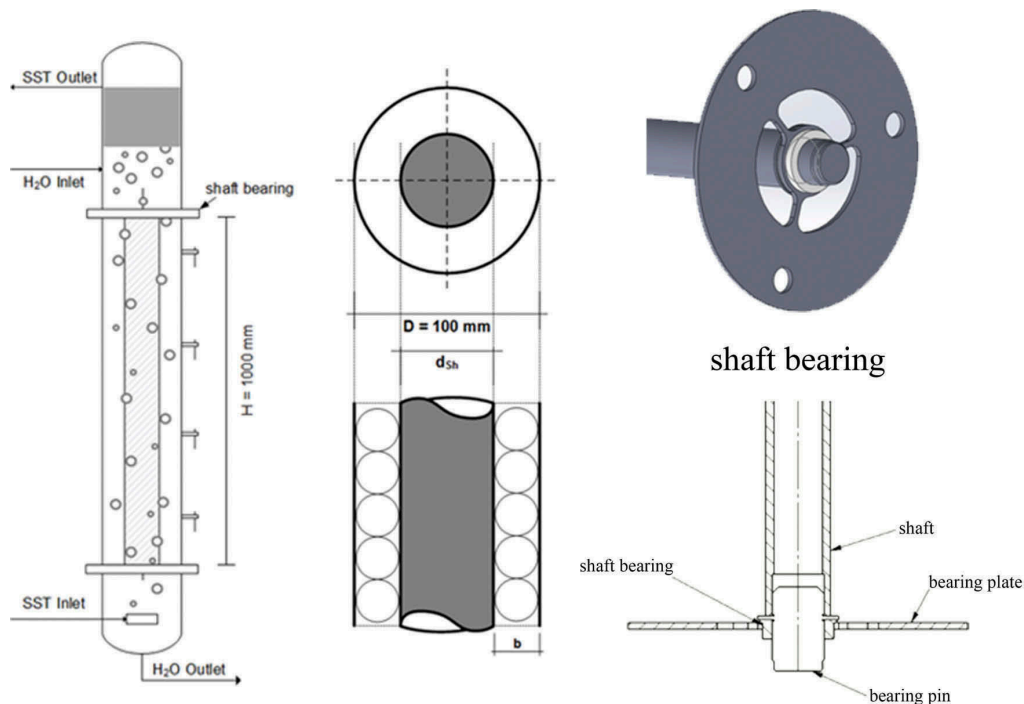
Schematic drawing of the Taylor–Couette contactor and a sketch of the shaft bearing.
